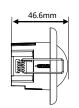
Dimensions - Front View Figure 3. Dimensions - Side View
